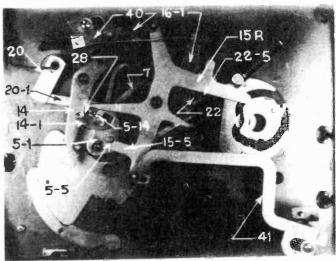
Bottom view corresponding to Fig. 11. The friction-clutch plate 5-1 has been pushed partially outwards (thus moving the tone arm) so that pin 5-14 becomes latched to link 5-1 by latch pawl 14-1 and so with locating lever 14. The record shelves have been turned further by the inward movements of the toothed links 40 and 41. This is check point No. 6.
